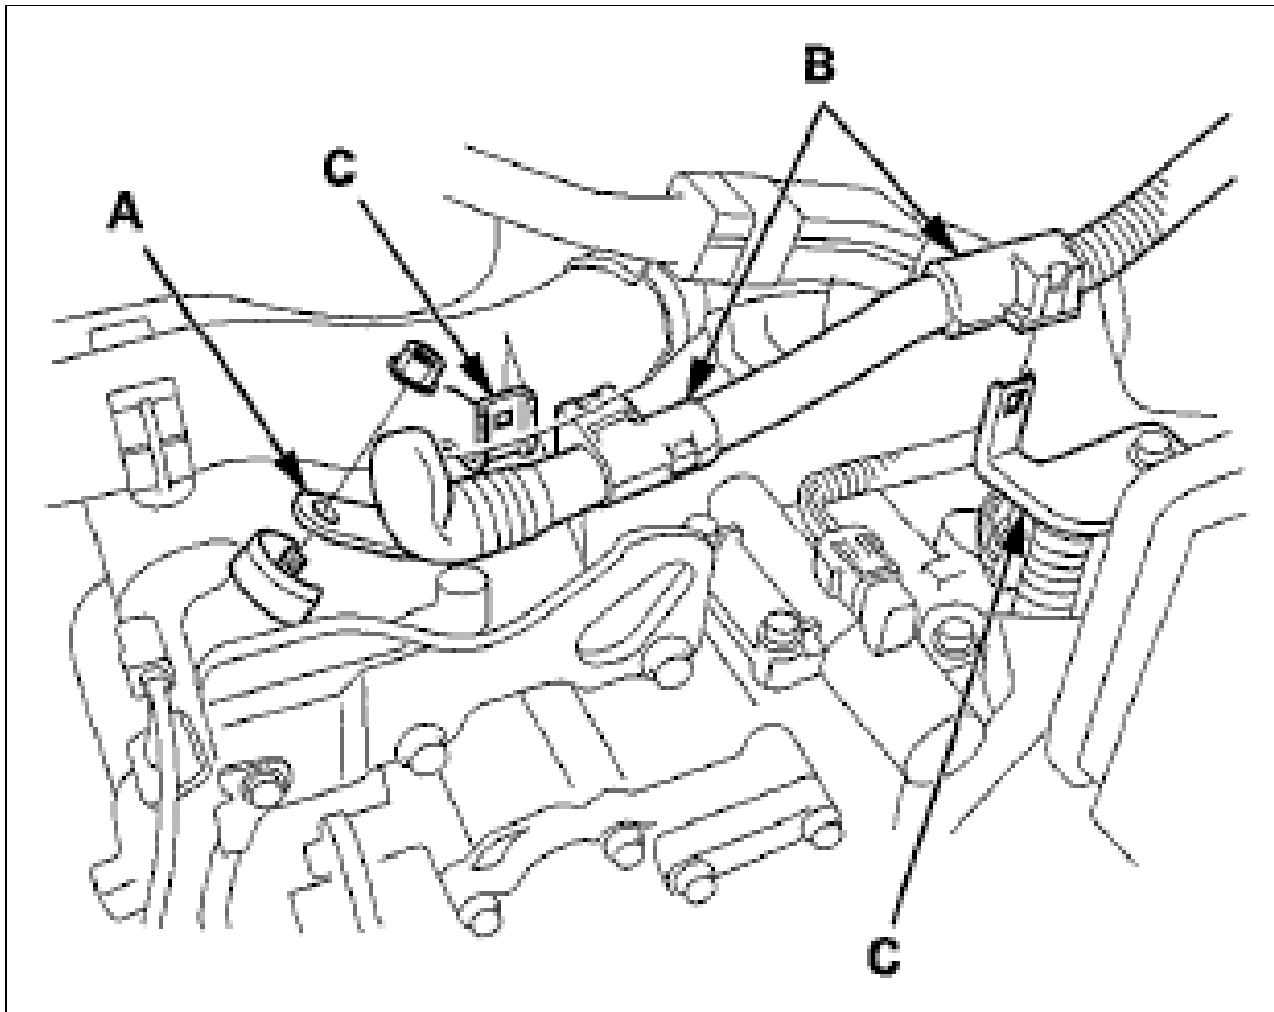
Identifying Positive Starter Cable, Harness Clamp And Clamp Bracket
